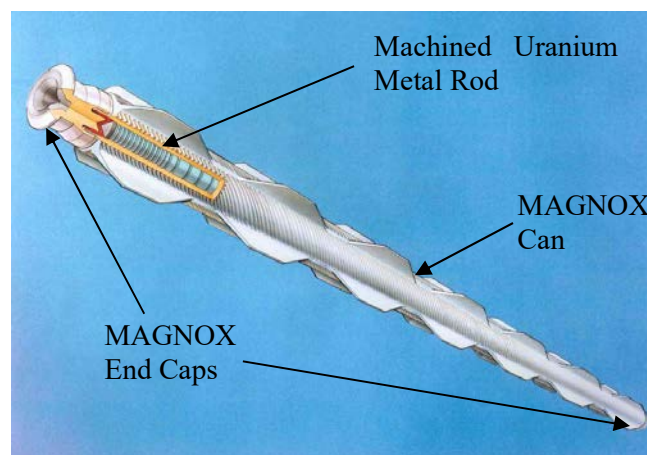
MAGNOX fuel assembly (figure courtesy of Sellafield Ltd.).
